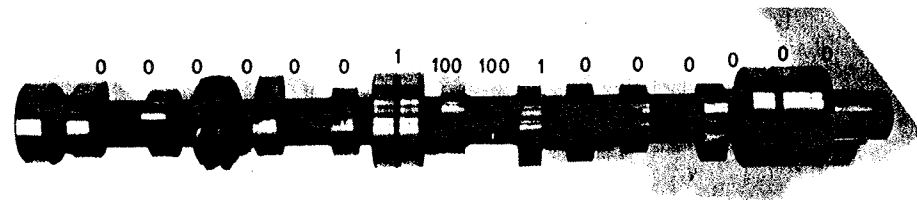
Location chart for camshaft with saw cut damage (model crack). [From Cawley and Adams (1979c).]
